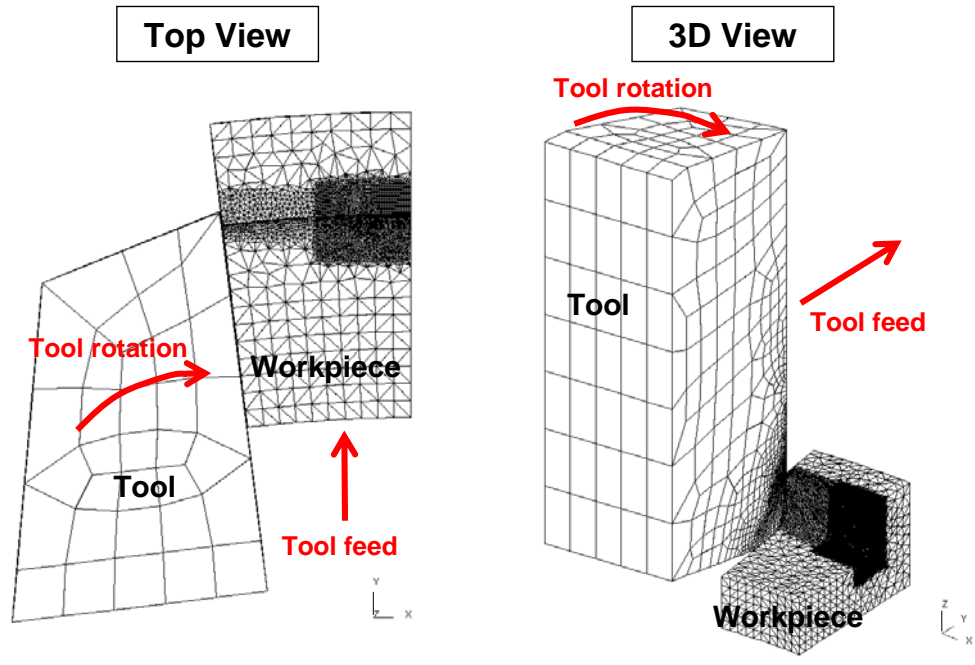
Mesh definitions of tool and workpiece objects in 3D face milling simulation
